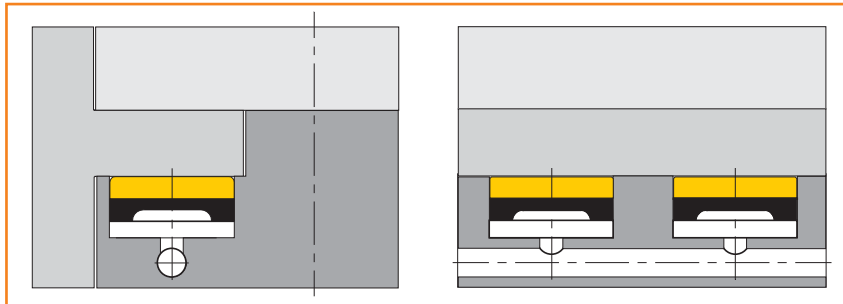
shows the classical method of using Clamping Discs. These are set into a lower locking bar and joined together by means of a continuous longitudinal hole.
